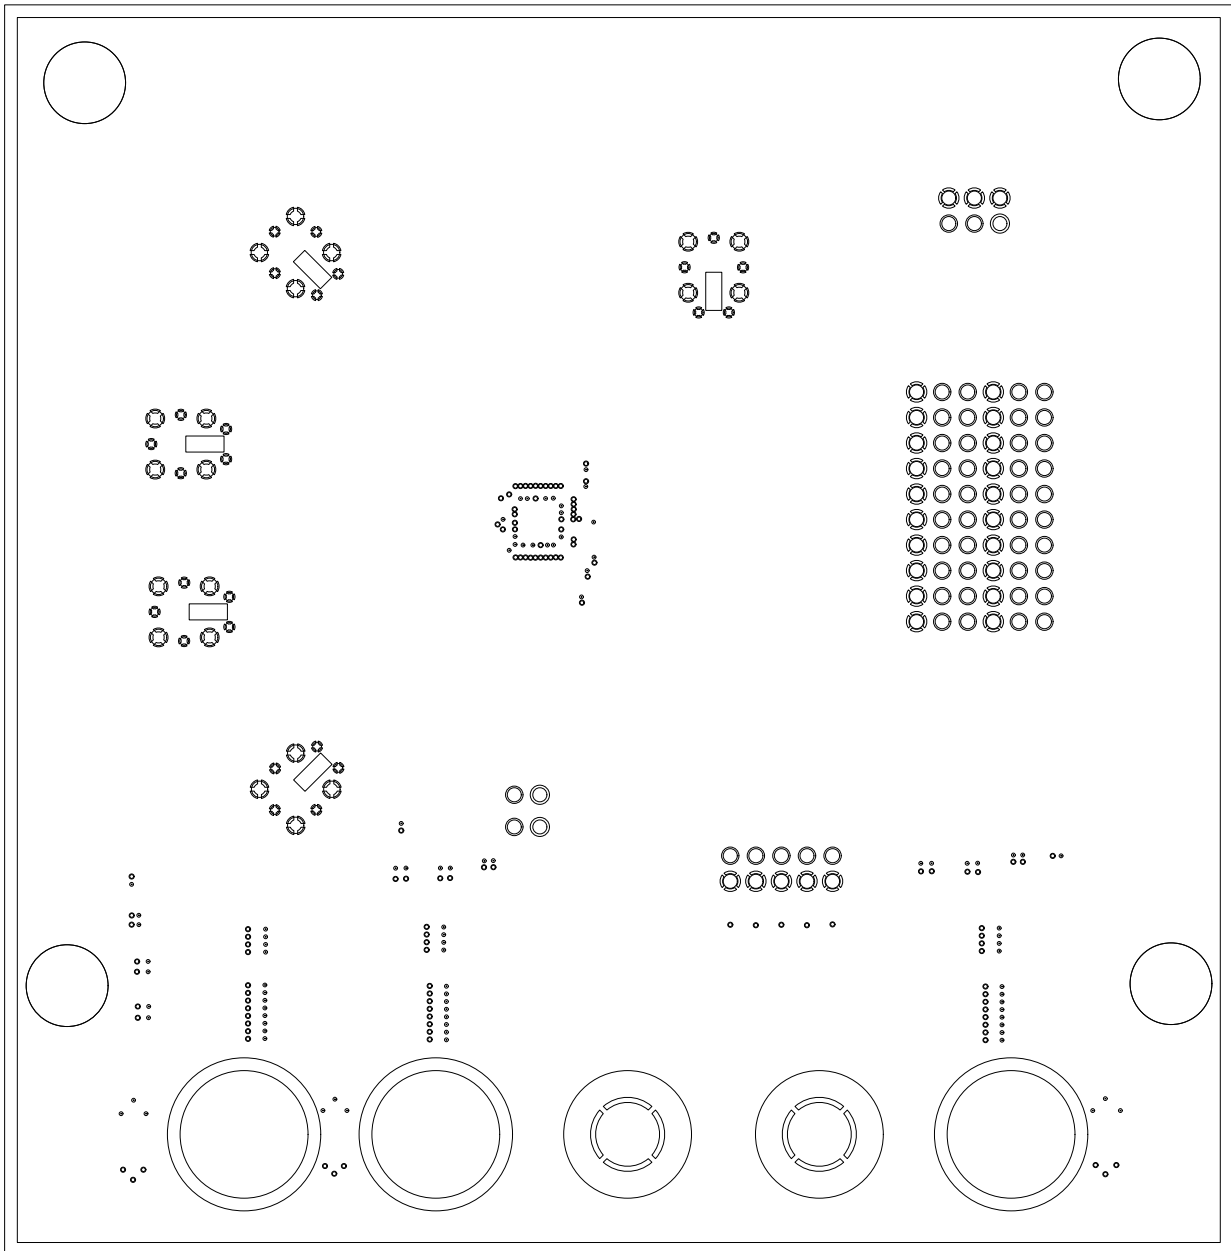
TLK1221 Board Layout: GND (Layer 2)
